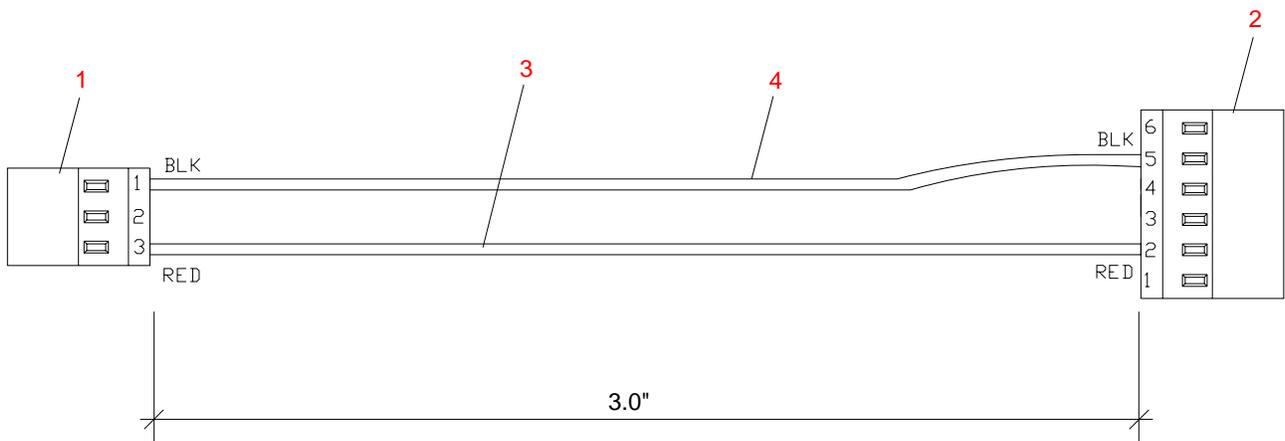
VLX Wash 24V Supply Cable Assembly
